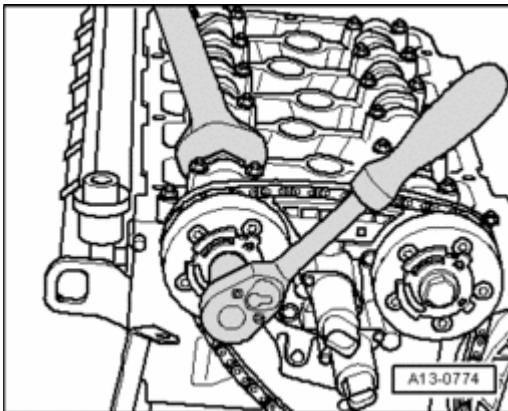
Unscrewing Securing Bolt At Camshaft Adjuster (Intake Side)
